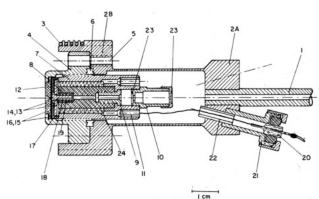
Pulsed valve for high temperatures: 1, gas feedthrough; 2, stainless valve body; 3, mineral-insulated heater wire; 4, valve front end flange; 5, tightening screws; 6, copper gasket seal; 7, coil housing made of soft iron; 8, coil core made of soft iron; 9, tightening nut; 10, cartridge containing sample; 11, electrical connection to coil; 12, replacable nozzle end piece; 13,14, moving valve stem made of soft iron disk and carbide center piece; 15,16 "KAPTON" seals (replaceable); 17, retaining disk for valve stem; 18, return spring made of Mo-Re alloy. 19, hardened steel sleeve to guide reciprocating stem; 20,21, electrical feedthrough and housing, 22; ceramic tube for insulation; 23, sample container cover cap; 24, glass braided sleeve insulated copper wire (20 turns).
